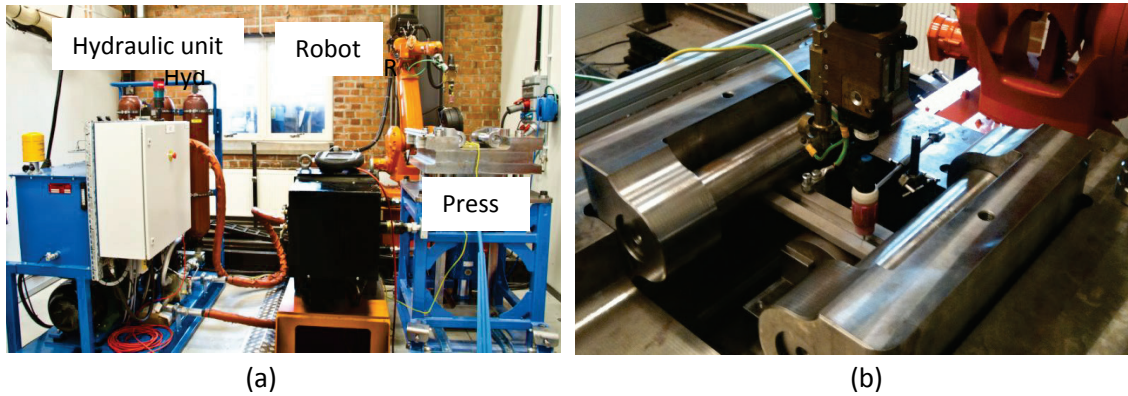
Vareststraint test equipment including (a) hydraulic unit, welding robot and (b) press.
